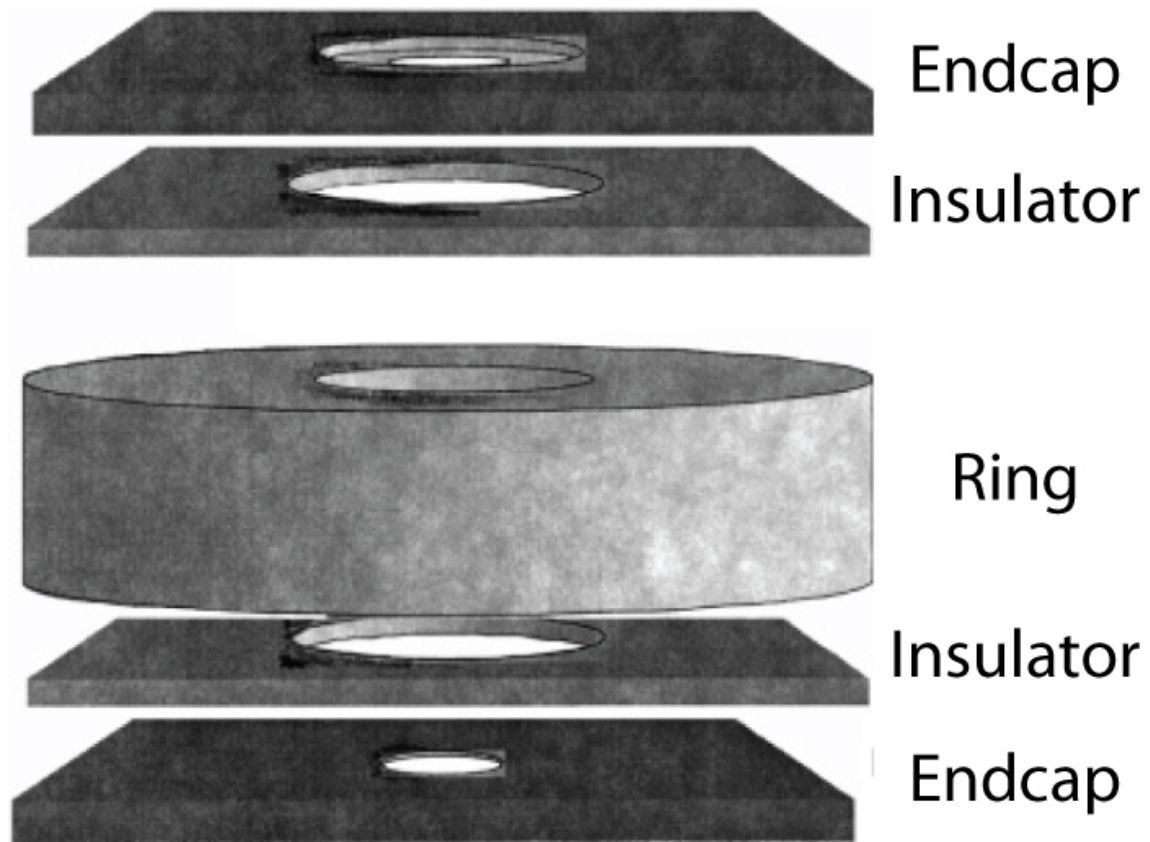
Exploded view of a CIT showing the simplified electrode geometry with cylindrical hole profiles.²⁷
